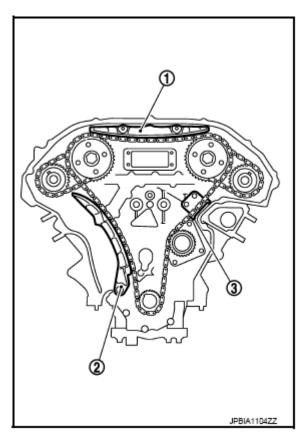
Identifying Internal Chain Guide, Slack Guide And Tension Guide Courtesy of NISSAN NORTH AMERICA, INC.
